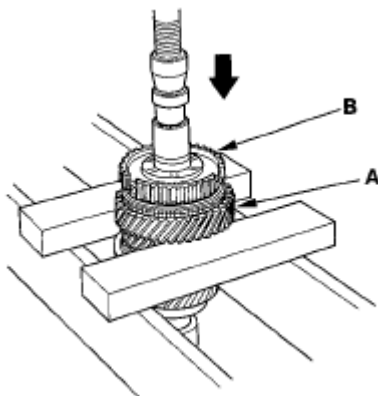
Pressing Mainshaft Out Of 5th Synchro Hub
